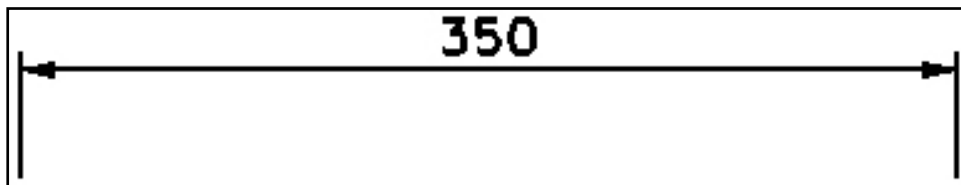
Dimension in millimeters. Always shown as a whole number
